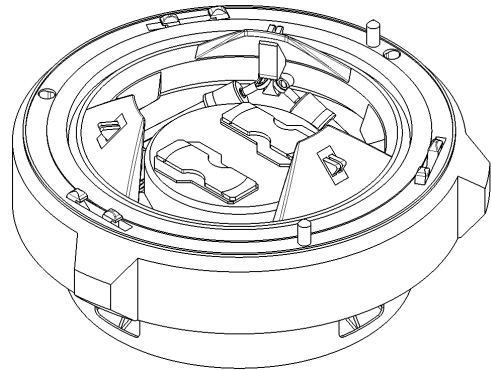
ADAPT system shown in fully retracted position (CATIA V5 CAD Model)
